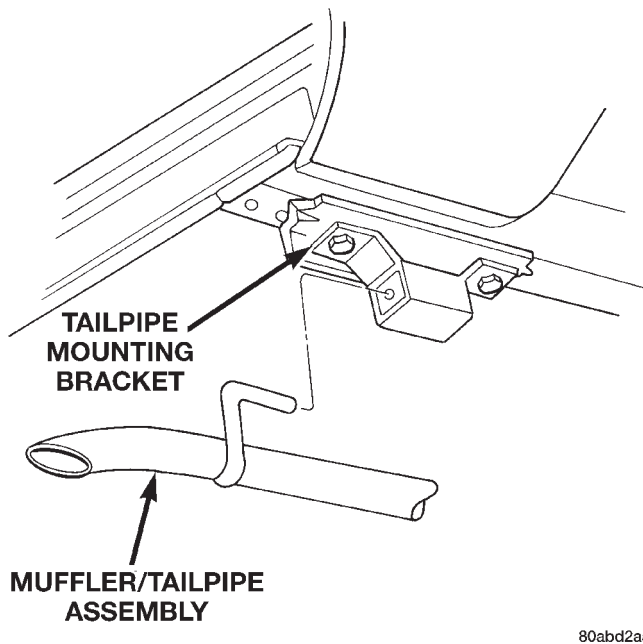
Rear Exhaust Tailpipe Mounting Bracket
